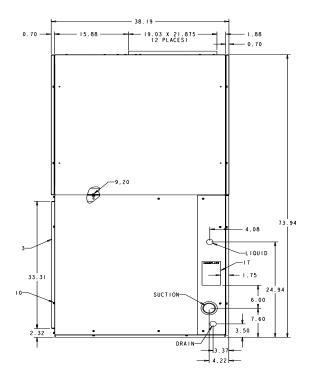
UNIT DIMENSIONS - LA300, LB360 & LB480
